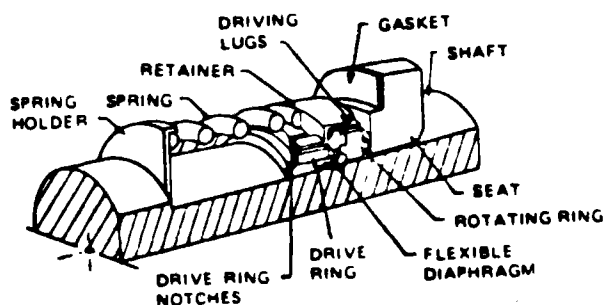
CRANE Type 21 Mechanical Seal Assembly.
